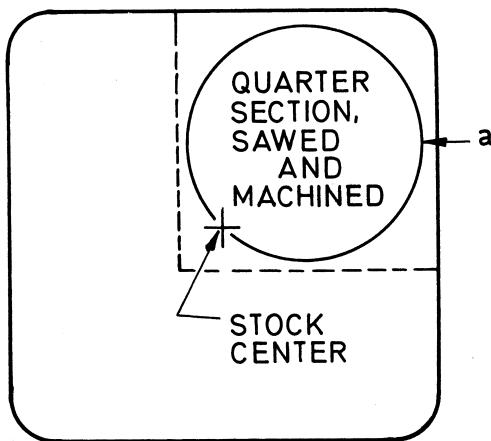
QUARTER SECTION SPECIMEN FROM SQUARE SECTION FOR MAGNETIC PARTICLE TEST, MACHINE ONLY
